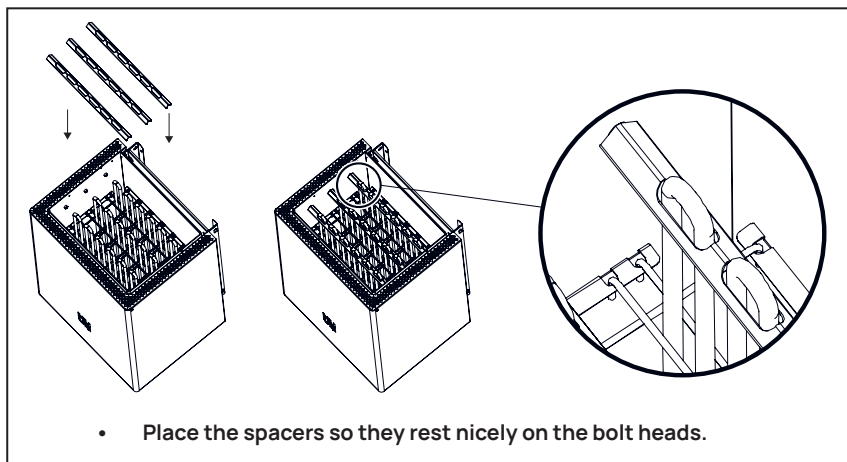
Installation of the HUUM CORE Wall and CORE Wall Combi heating elements spacer.
